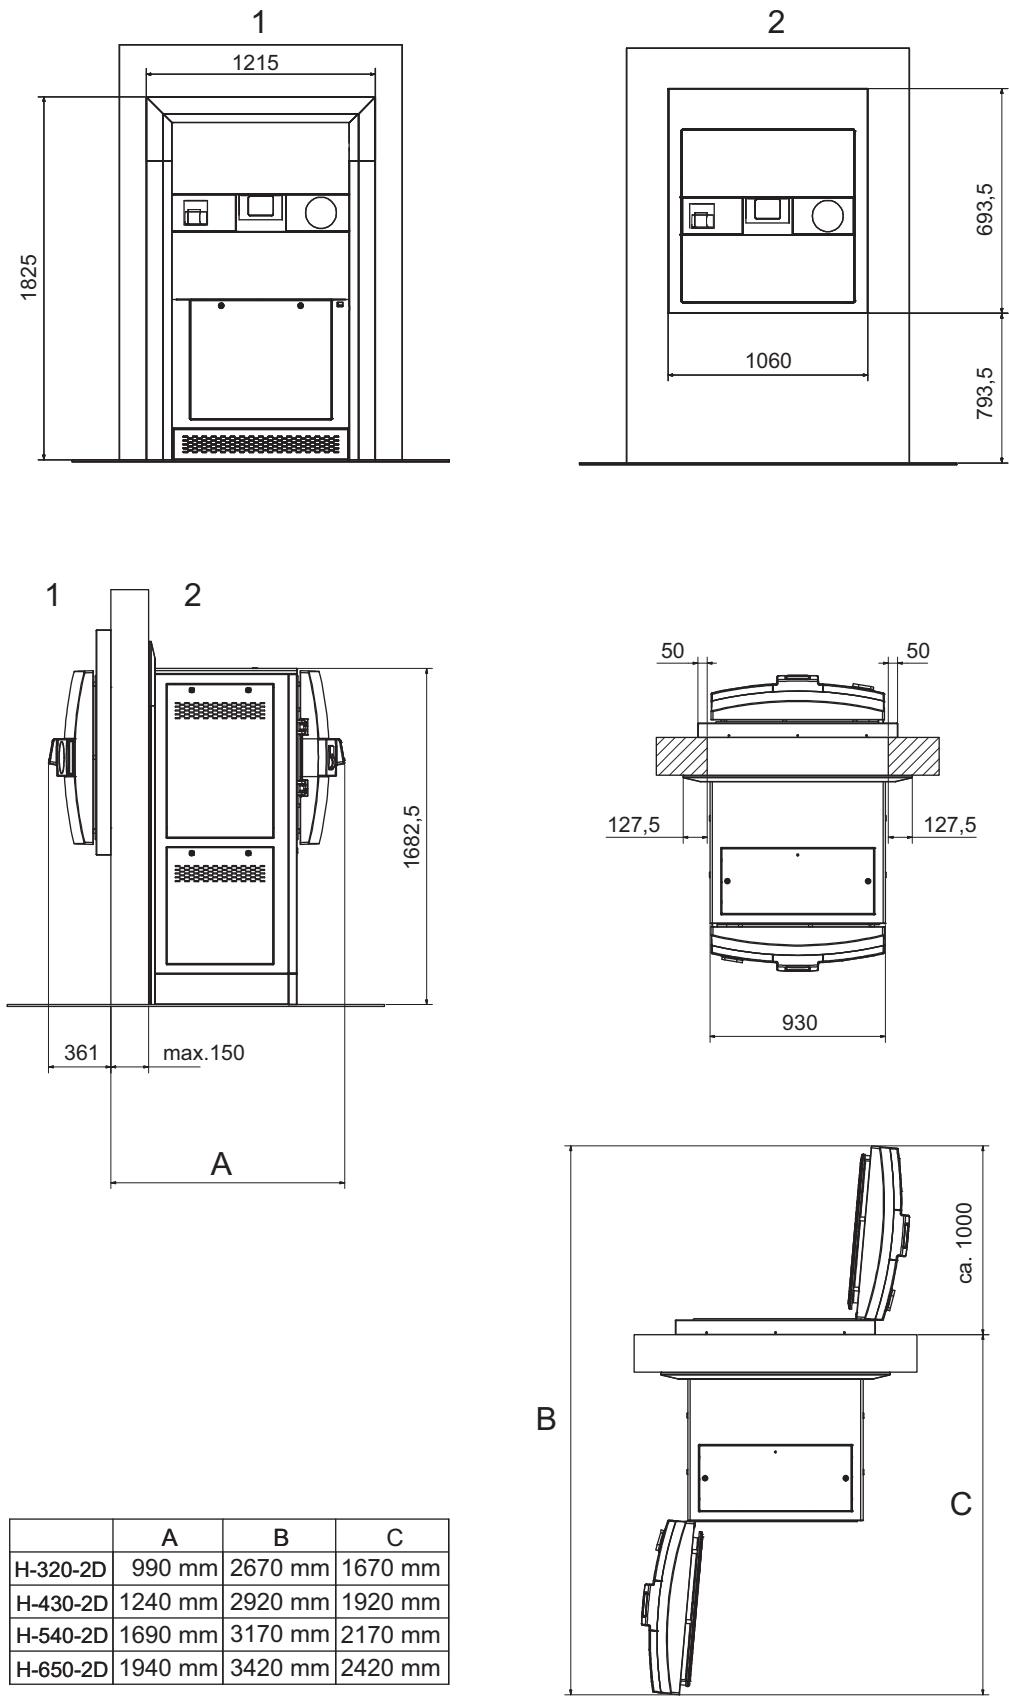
External dimensions for Systec H-2D; 1 = machine side, 2 = bioshield side
